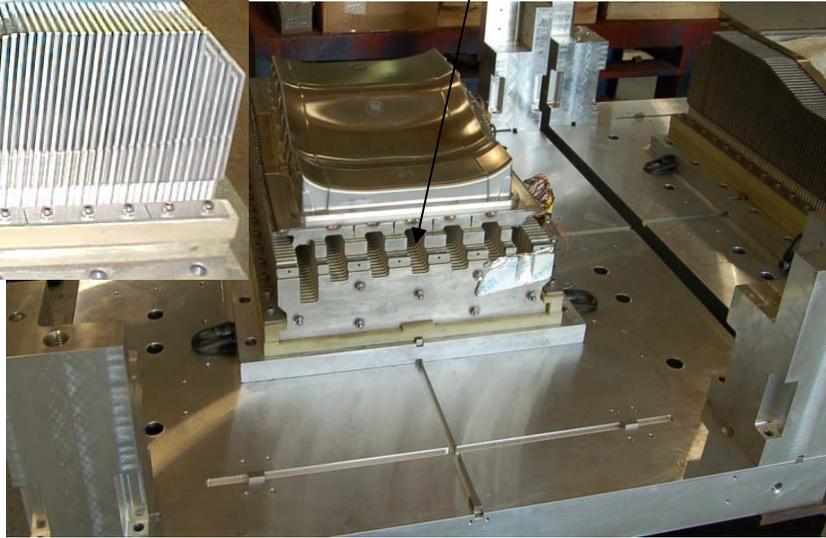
Completed tooling insert as shown in the upper left picture and the insert positioned on the die shown in the bottom right
